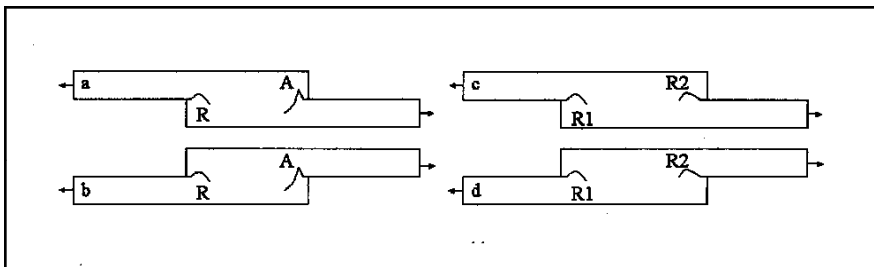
General schematic of FSW lap joints (including typical interface features) and definitions of possible configurations for overlap shear testing. Arrows indicate loading directions. A — R-loaded, single-pass weld in lap joint; B — A-loaded, single-pass weld in lap joint; C — R1-loaded, double-pass weld in a lap joint; D — R2-loaded, double-pass weld in a lap joint.
